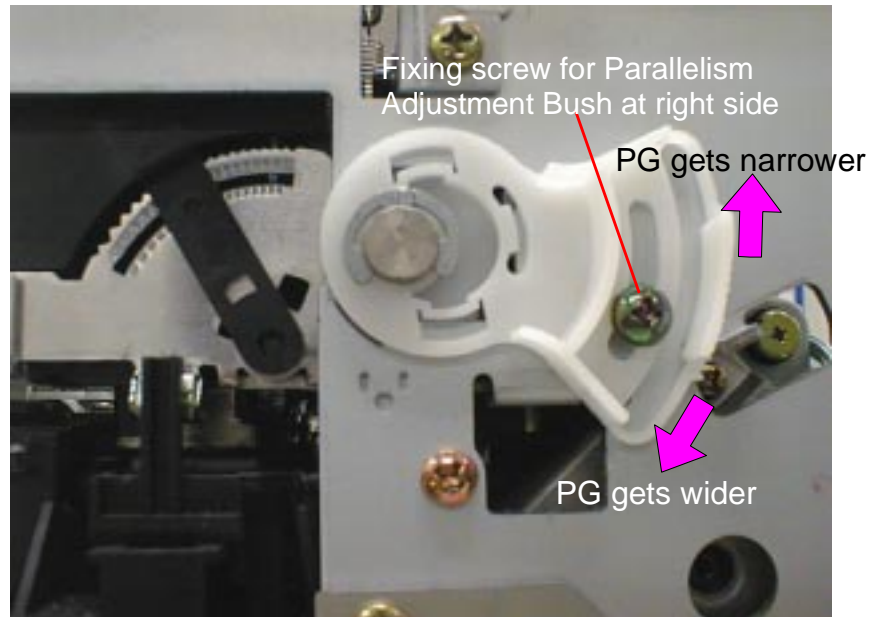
Fixing Screw for Parallelism Adjustment Bush (Right Side)
